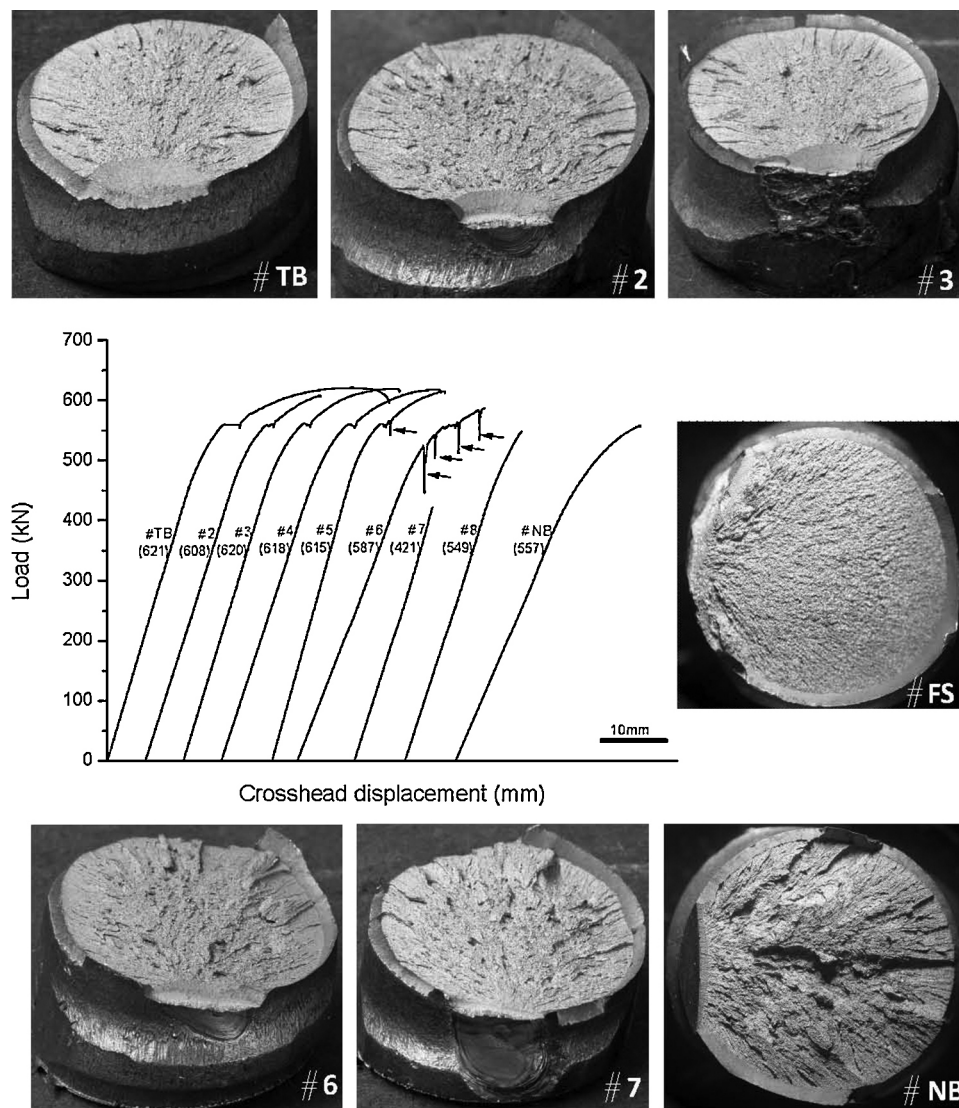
Load-displacement curves for the undamaged (test #TB), AS-affected (tests #2 to #8), and notched (test #NB) bars, and macrofractographs showing the appearance of the fracture surface of the samples. Additionally, for comparative purposes, the fracture appearance of the broken during service threadbar is shown. The black arrows indicate a pop in. The numbers in brackets are the rupture load values.
